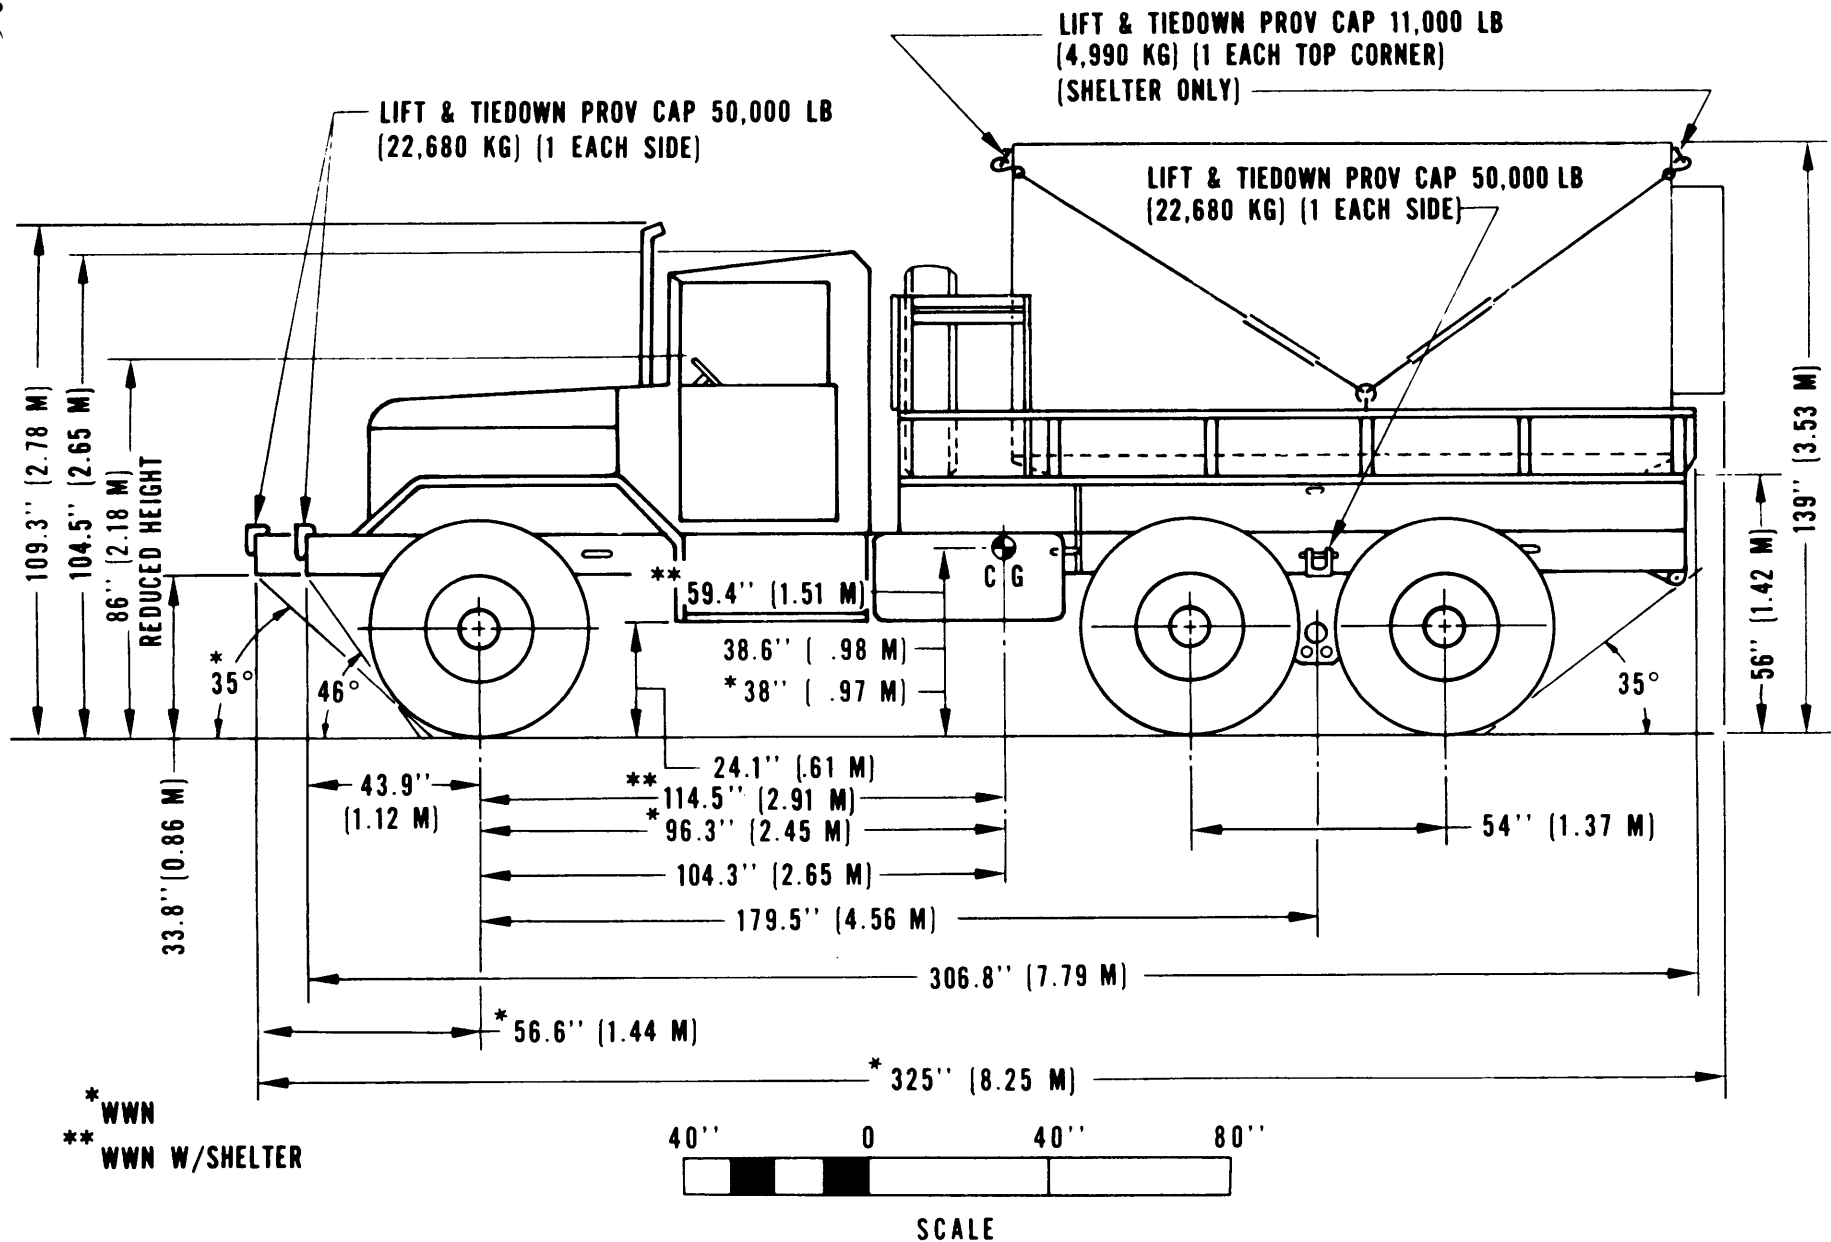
Side elevation, truck, cargo, M813A1; with shelter.
